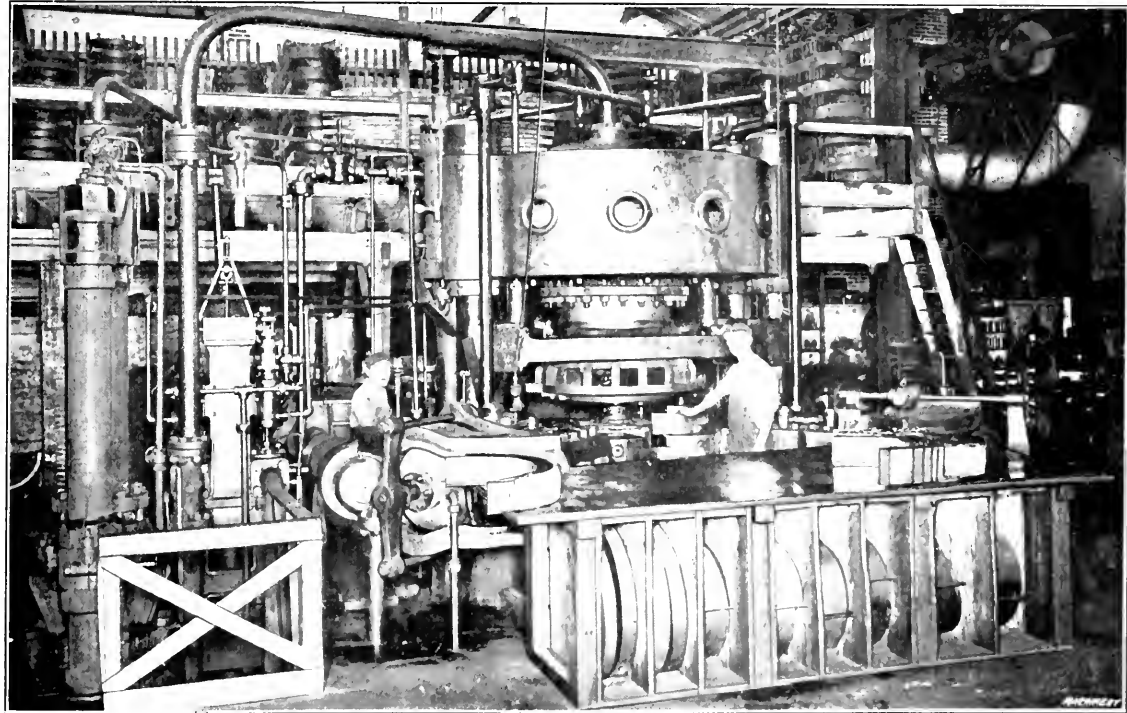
Large Hydraulic Press equipped with Dies and used for finish-forming Rim Sections
